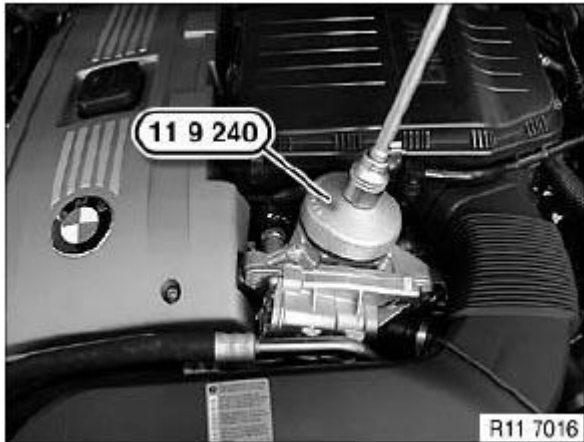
Identifying Special Tool 11 9 240 For Releasing Oil Filter
